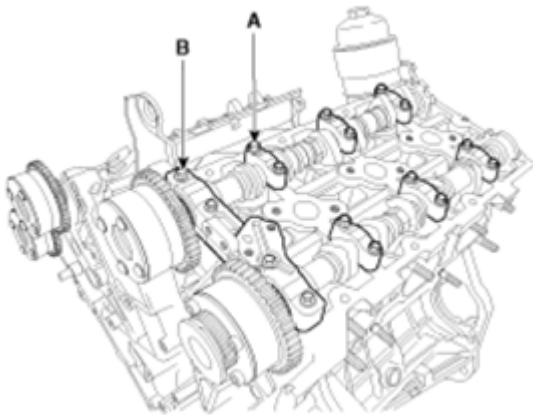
Identifying LH/RH Camshaft Bearing Cap And Thrust Bearing Cap
